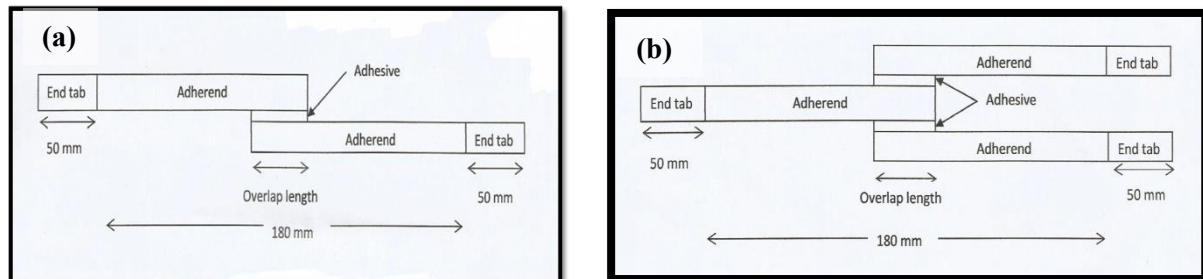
The geometry and dimension of (a) adhesively single-lap bonded joint (b) adhesively double-lap bonded joint.
